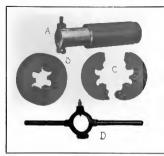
Remington Seren Culling Dies und Holderst A, Tool Employed with Lather B, Adjustable Dier C, Showing Construction of Hinged Dier D, Einstie Die Holder
